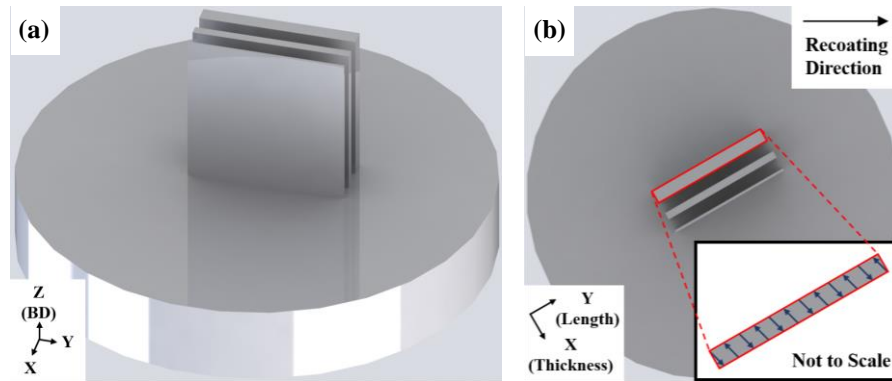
CAD Model of a Printed Plate with the Three Thin-Wall Parts. In (a) 3D View and (b) Top View Showing Thin-Wall Parts with Thicknesses of 5 mm, 1 mm, and 0.25 mm, Respectively. The Red Box in (b) Highlights the 5 Mm Thick Part with a Corresponding Close-Up Image Shown as an Inset. Blue Arrows Indicate Bidirectional Scan Strategy at a Hatch Angle of 15 Degrees with respect to the Part Thickness, Employed for all the Thin-Wall Samples. The Laser was Scanned at a 45-Degree Angle with Respect to the Recoating Direction (Top Right).
